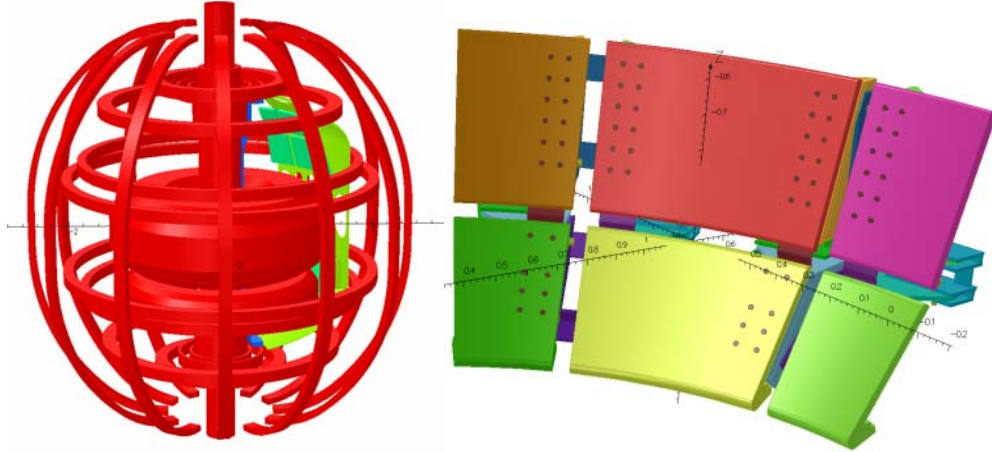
NSTX PF, OH, TF coils with 60 degree model of passive plates and support bracket, VV and CS casing (left); passive plates, support brackets and connecting bolts only (right)
